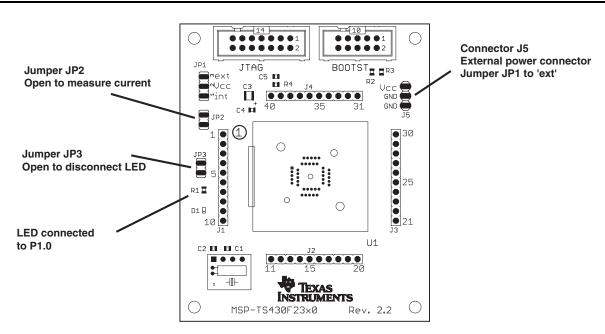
MSP-TS430QFN23x0 Target Socket Module, PCB
